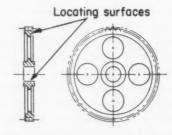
Aircraft gear lacks rigidity and adequate locating surfaces for ideal processing.
